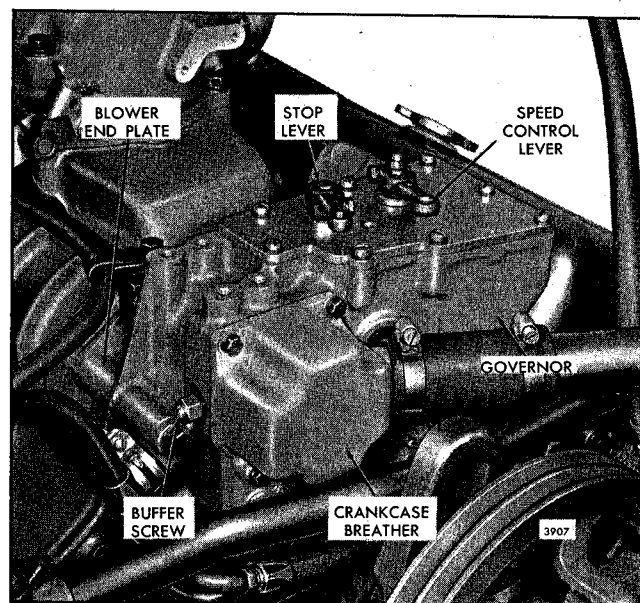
Limiting Speed Governor Mounting (8V Engine)
